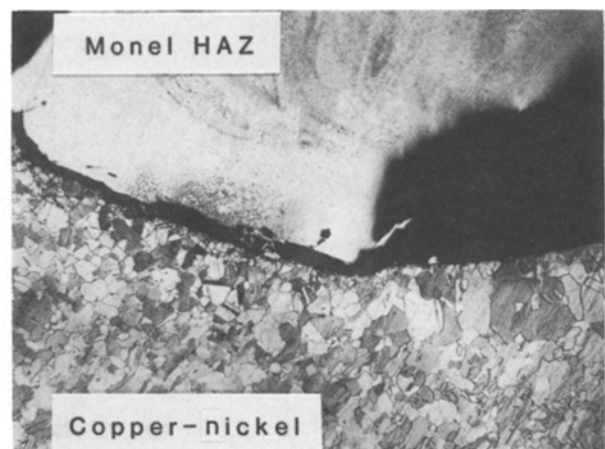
Secondary cracking caused by lack of side-wall fusion at the plug weld $\times 25$.
